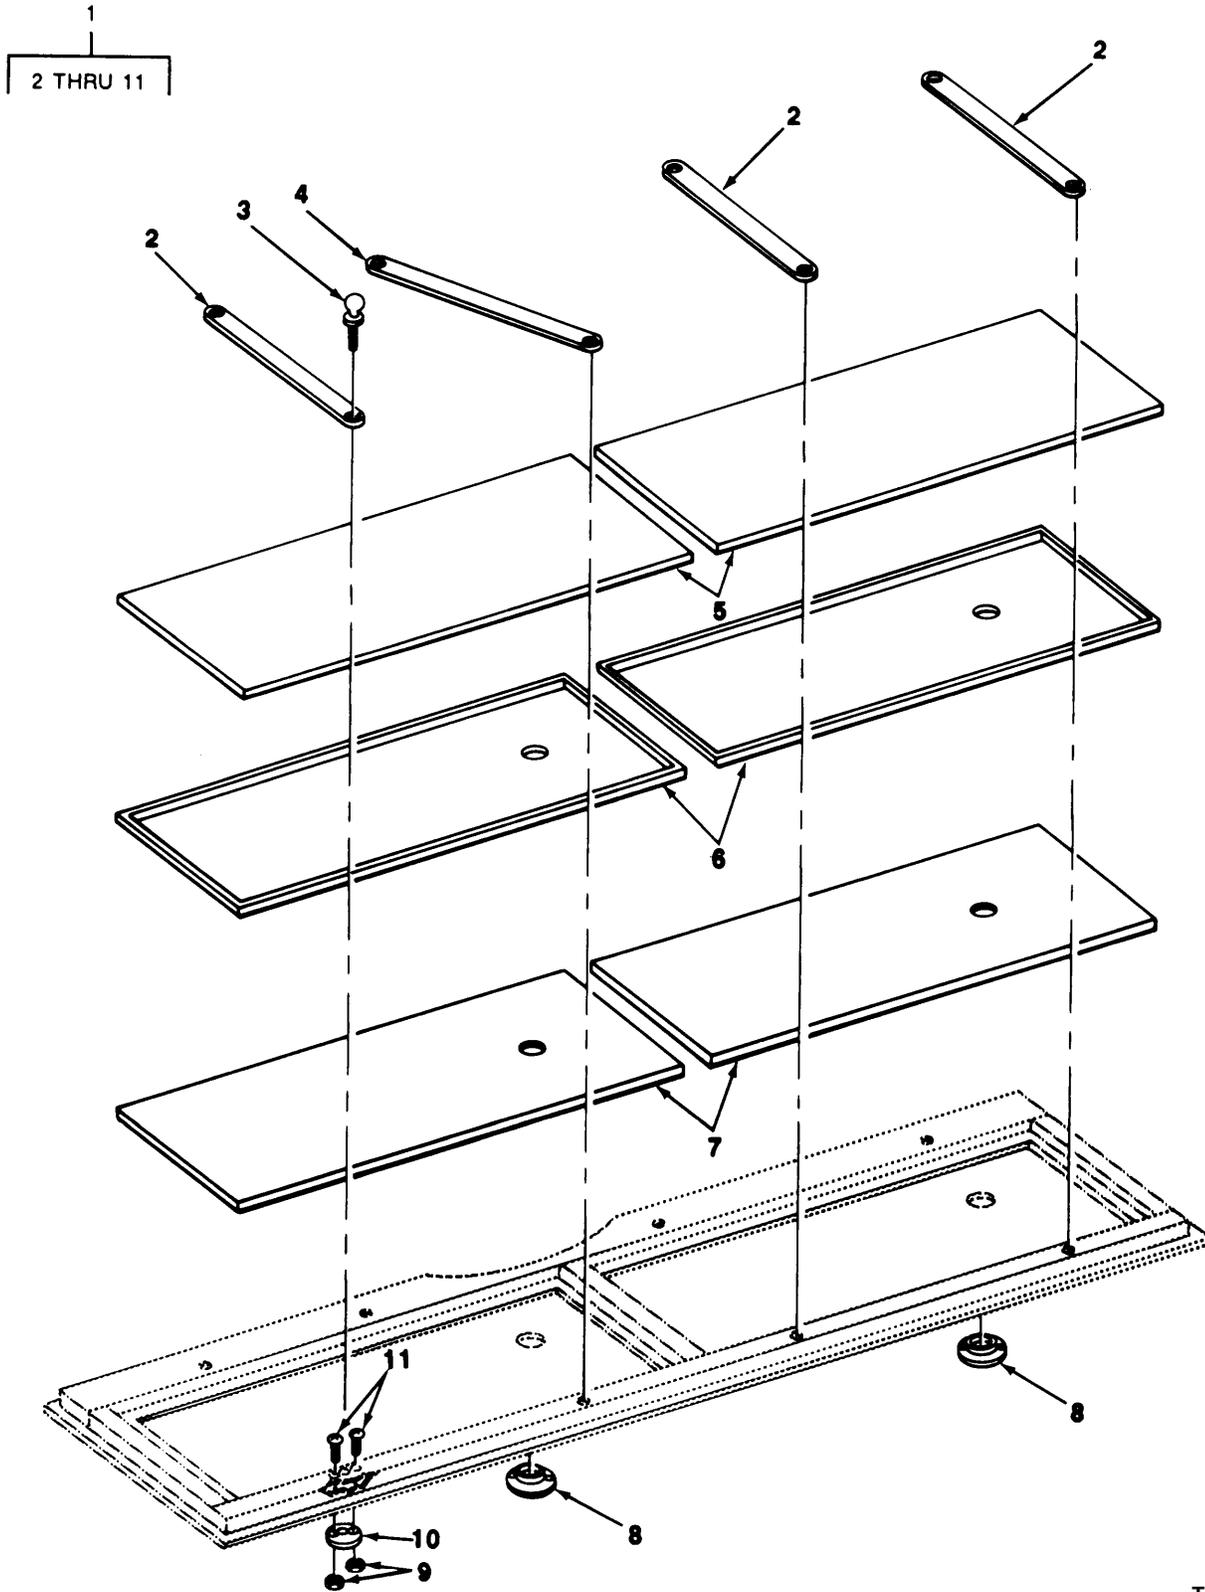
LOWER SIDE DOOR ASSEMBLY BATTERY SHOP VAN (M448).
